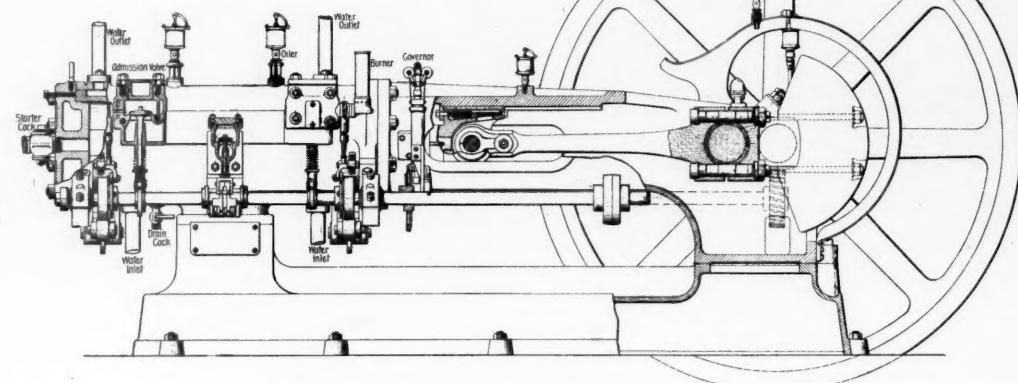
Side Elevation of 16 x 20 in. 100-B. H. P. "American" Gas Engine.
